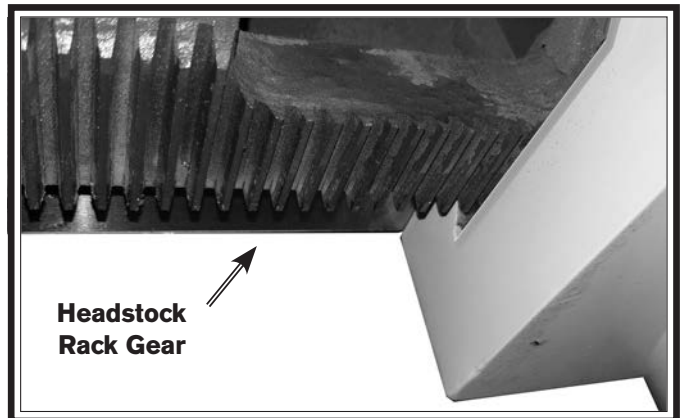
Headstock slide rack and pinion assembly (pinion hidden).
